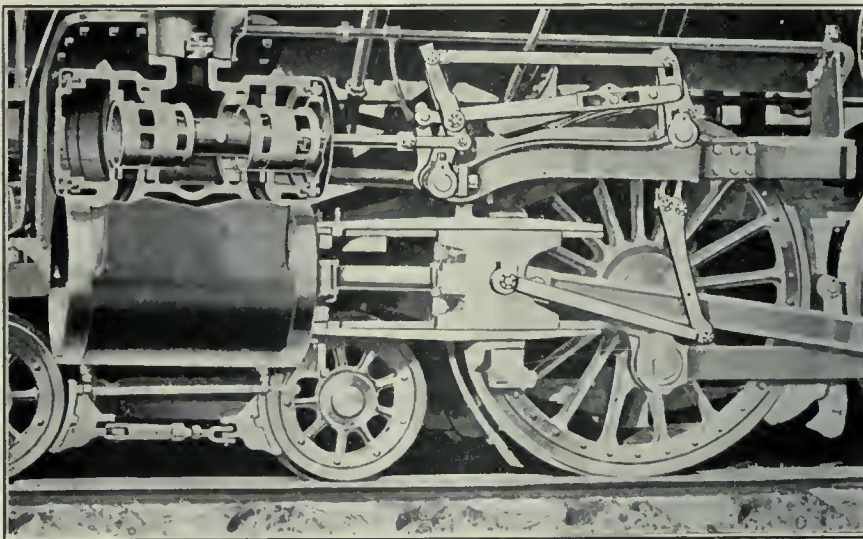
VIEW OF VALVE GEAR APPLIED TO A LOCOMOTIVE WITH VALVE EXPOSED
